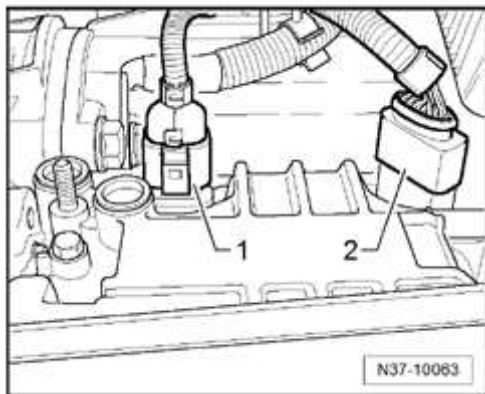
Identifying 8-Pin G68 and 14-Pin G93 Electrical Harness Connectors
